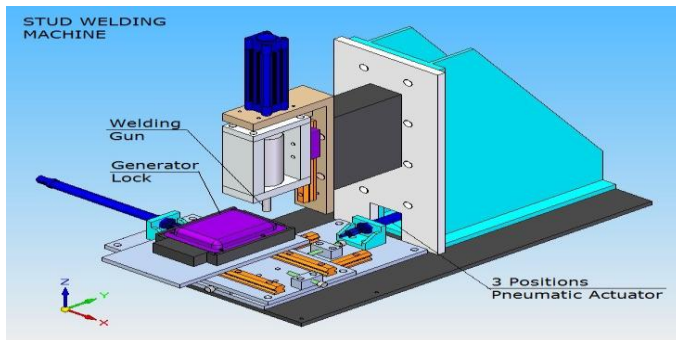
Three Positions Pneumatic Actuator for Stud Welding Machine
